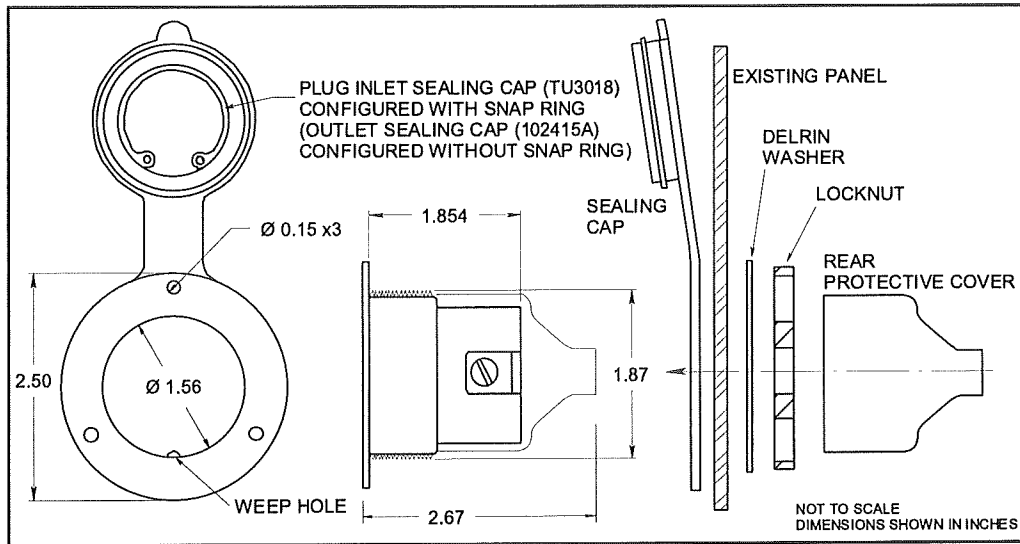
Inlet and outlet plug dimension requirements and layout.
